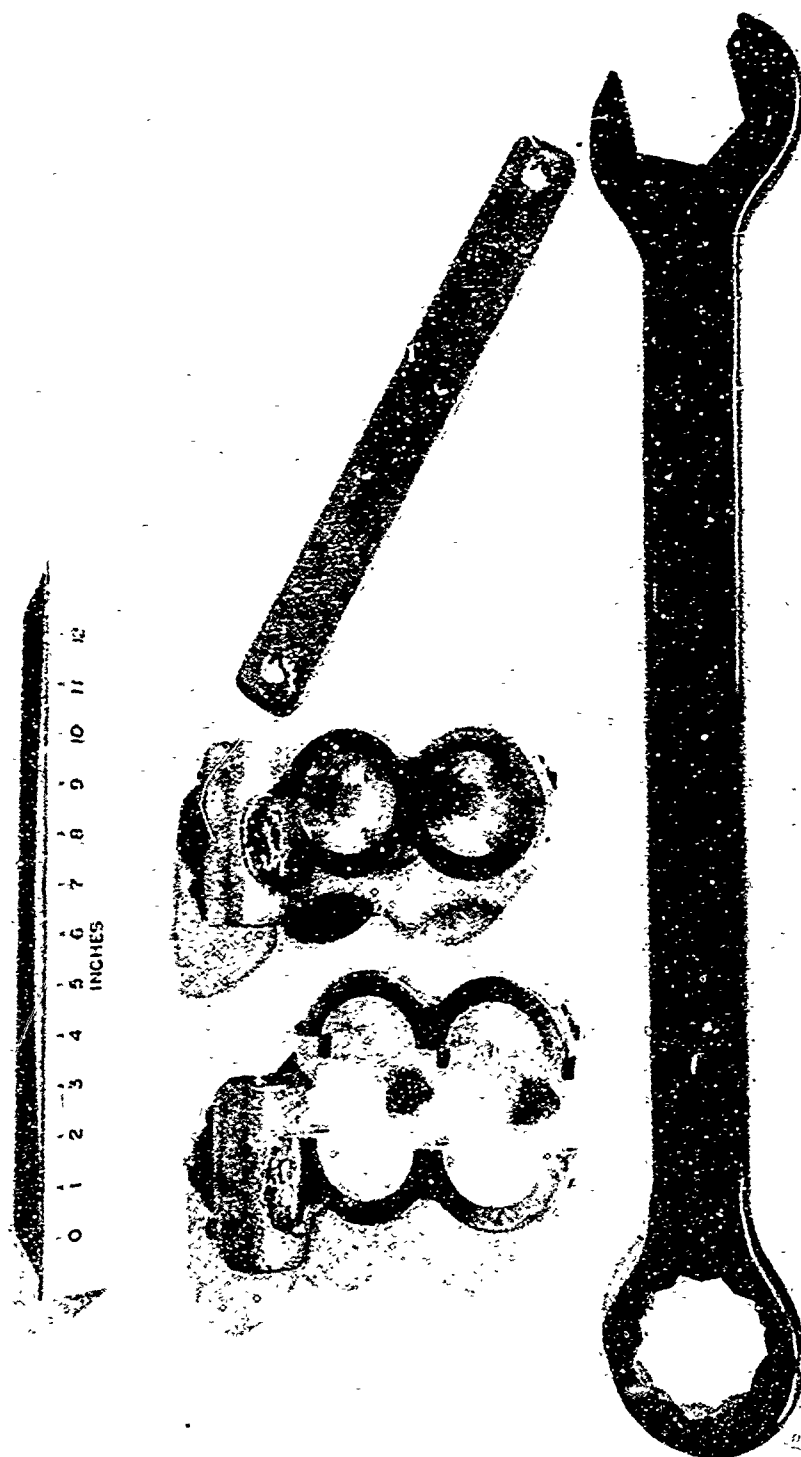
Wrench, boom-to-spar mount, and top pulley bracket for vertical antenna mounting.
